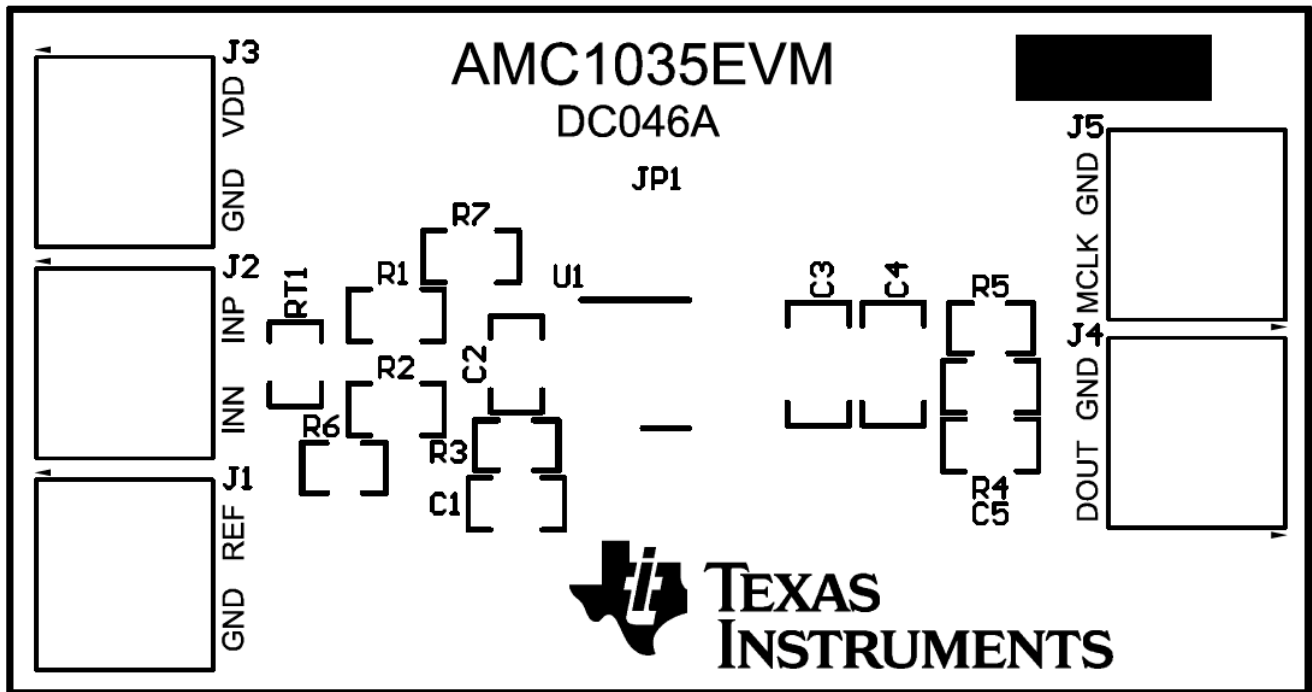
AMC1035EVM - PCB Top Layer Silk Screen
